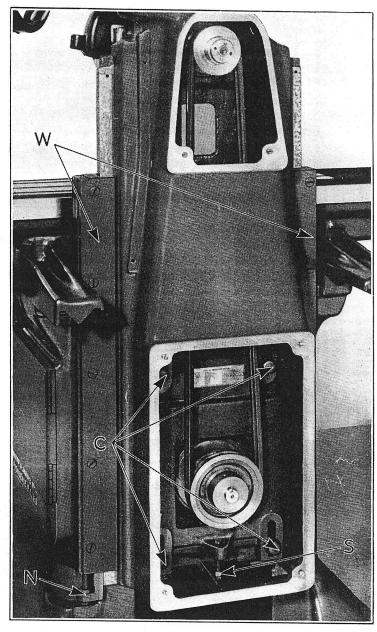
Rear View of Wheel Slide (guards removed), showing motor bracket clamp screws (C) and adjusting screw (S); gib adjusting nuts (N); and wheel slide straps (W).
